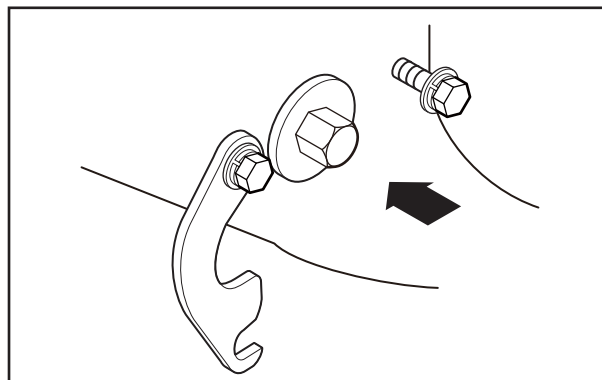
Manual Turning Gear Position (When Shaft Pushed-in)
